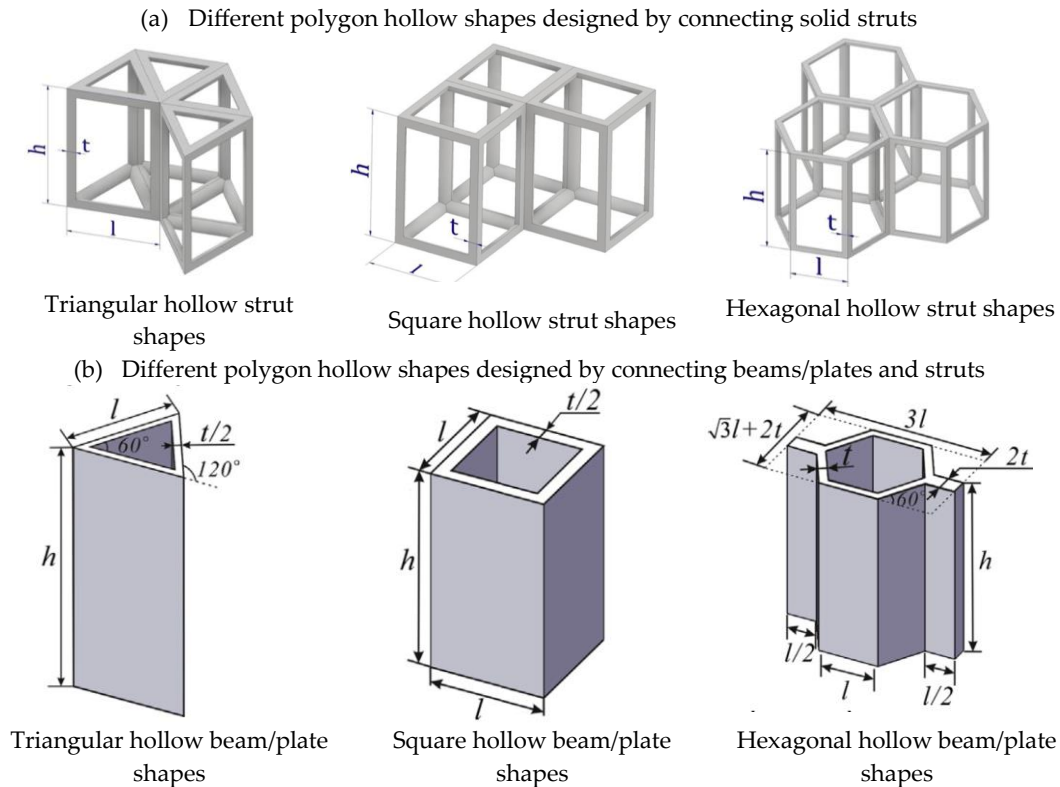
Typical polygon hollow shapes built using (a) struts [14] and (b) plates/beams [145]
